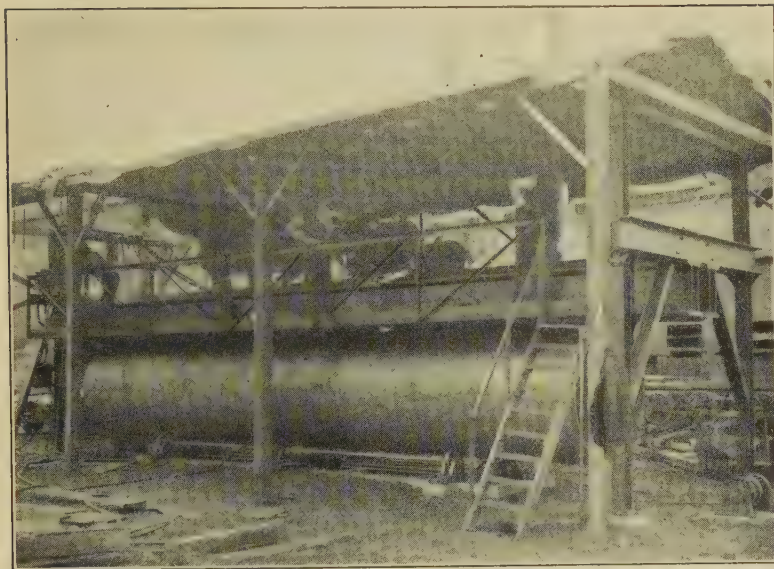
Automatic metal-arc-welding machine for pipes.
